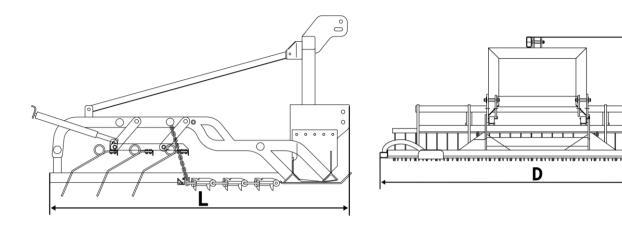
Transport dimensions of HYBRO 3,0 weeder harrow
